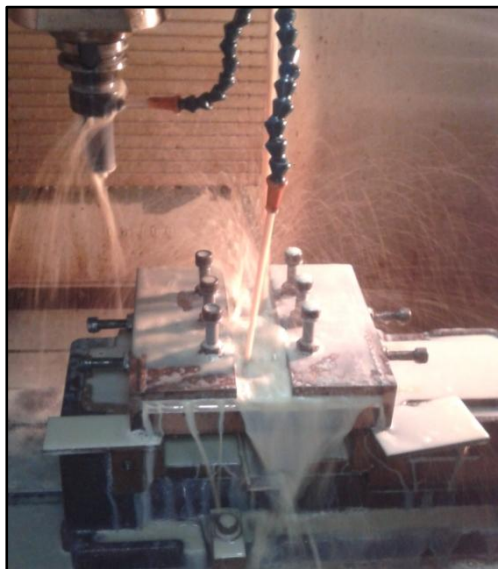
Jig and Aluminium plates inside the CNC Bridgeport Machine
